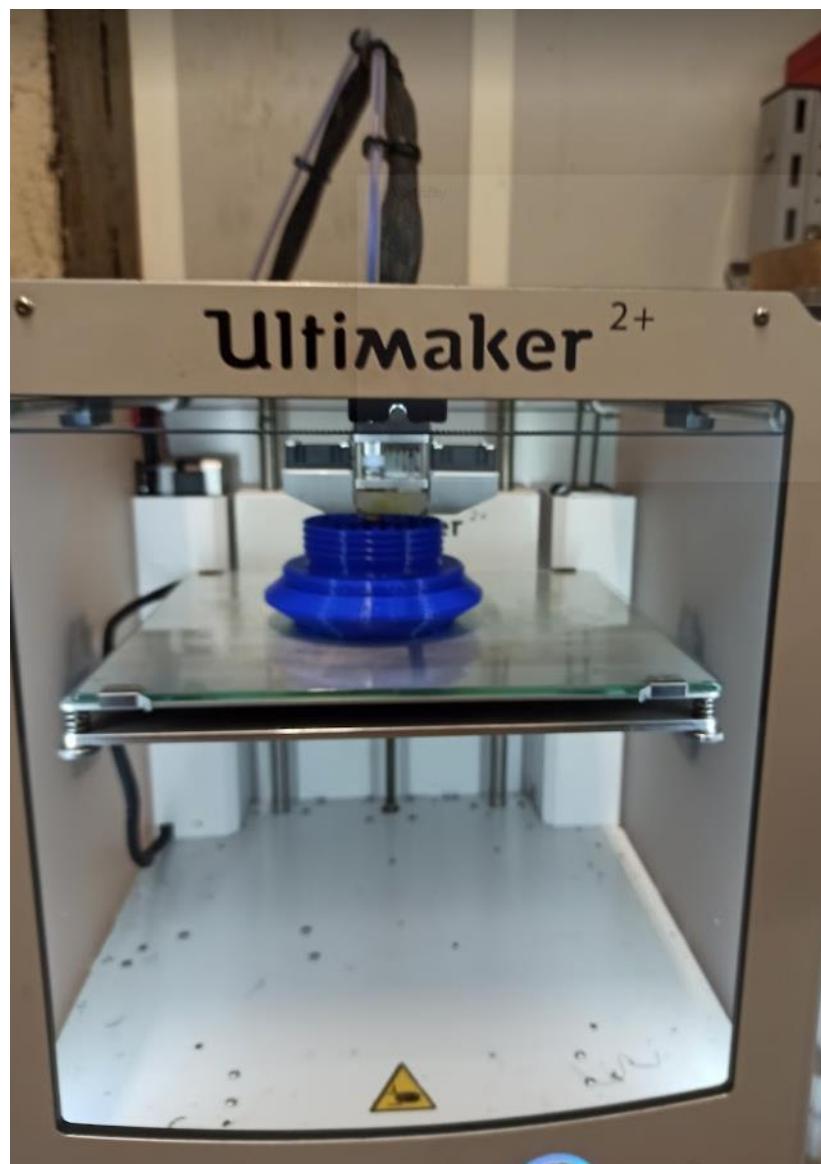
3D printing of locking bolt HP3 with 50% dimensions scale.
